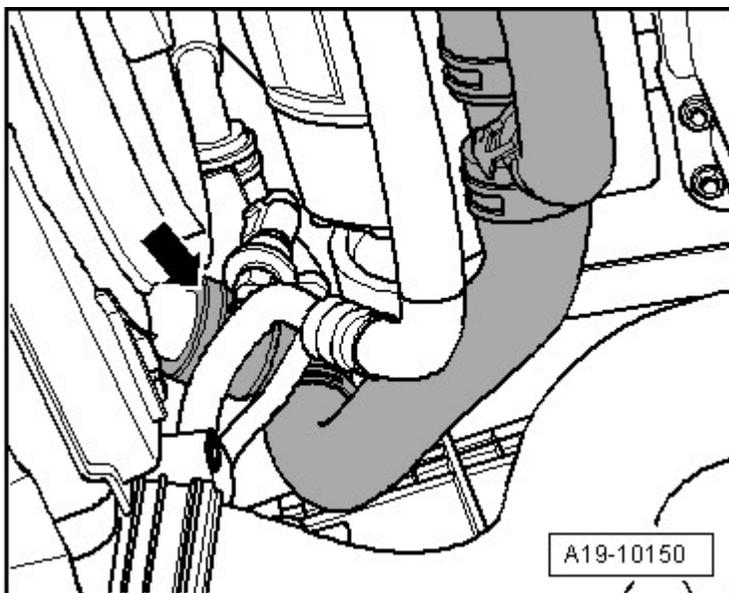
Identifying Coolant Hose Quick Acting Coupling
